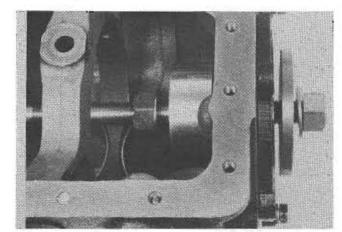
Insertion & Extraction Tool Assembled in Block for Flywheel End Main Bearing Insertion
